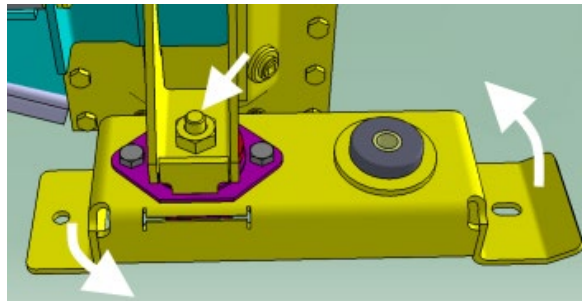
MOUNTING SUPPORT IN INITIAL POSITION
